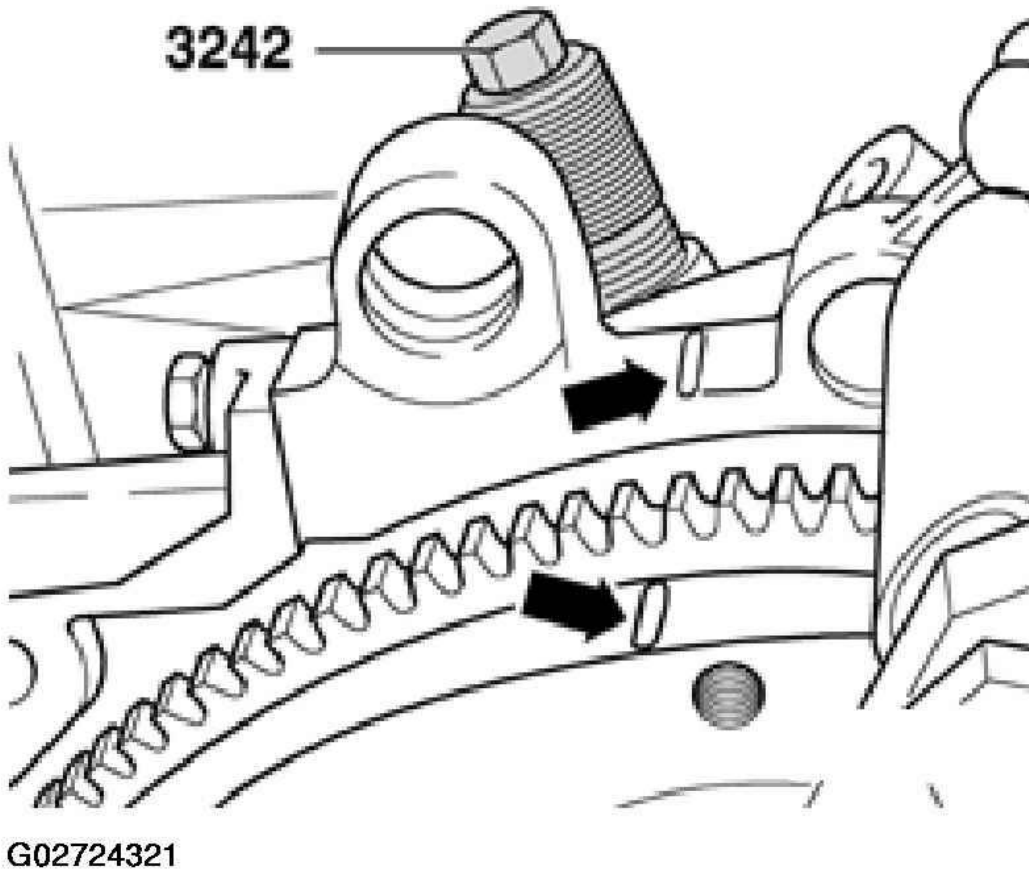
Screwing In Clamping Bolt 3242 To Secure Crankshaft At TDC
